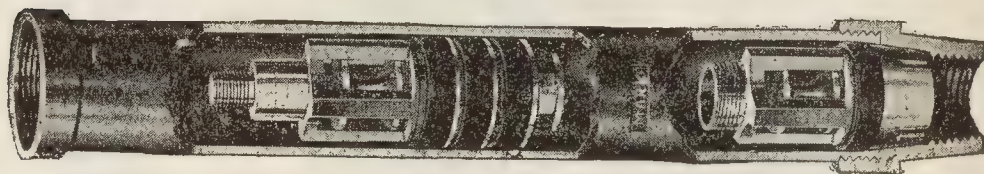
,735.—Columbiana deep well brass lined cylinder. *In construction*, the check valve is seated on a shoulder in a special coupling at the lower end of the cylinder. The plunger and lower valve can be inserted or removed through the connecting pipe, which is larger in diameter than the bore of the cylinder.
